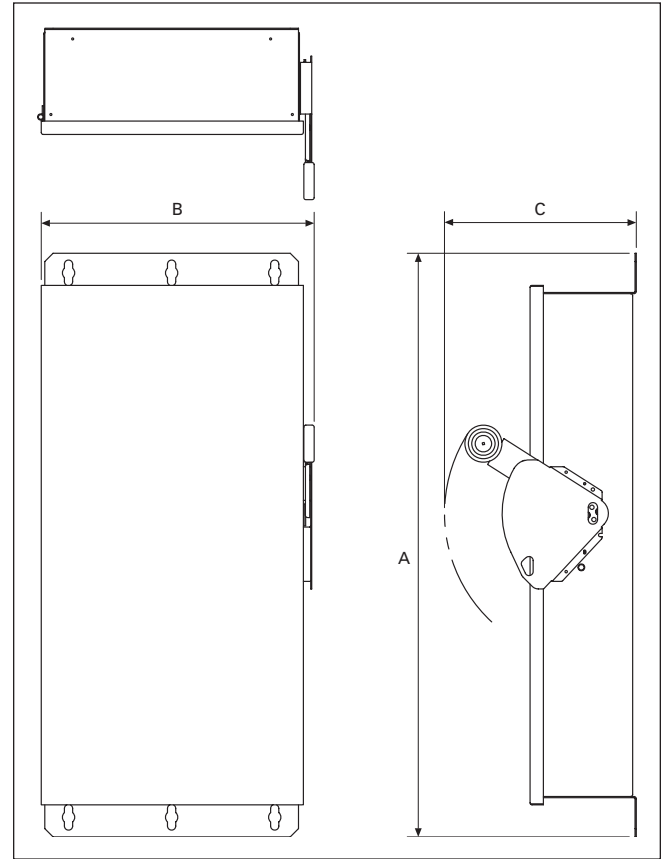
Type 12-3R and 4X Solar Switch Dimensions
